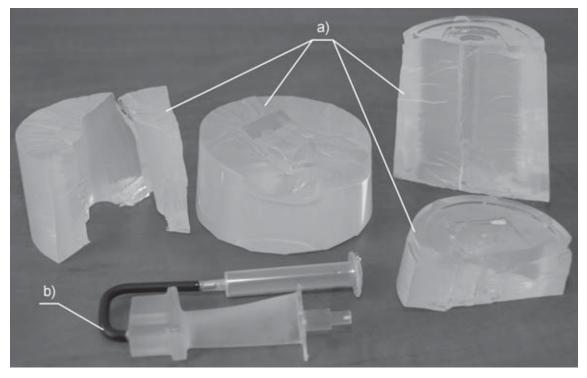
Silicone mould (a) manufactured on the basis model kit (b)
